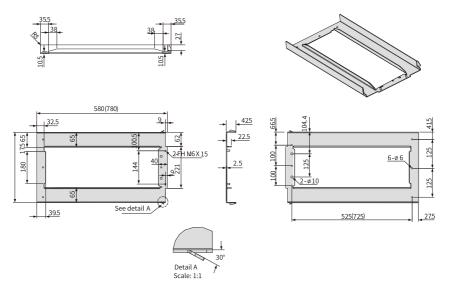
Dimensions of the bottom mounting bracket for T12 models
